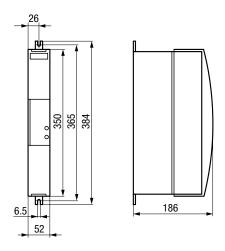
Dimensions of DE 4-BU4-1 brake unit
